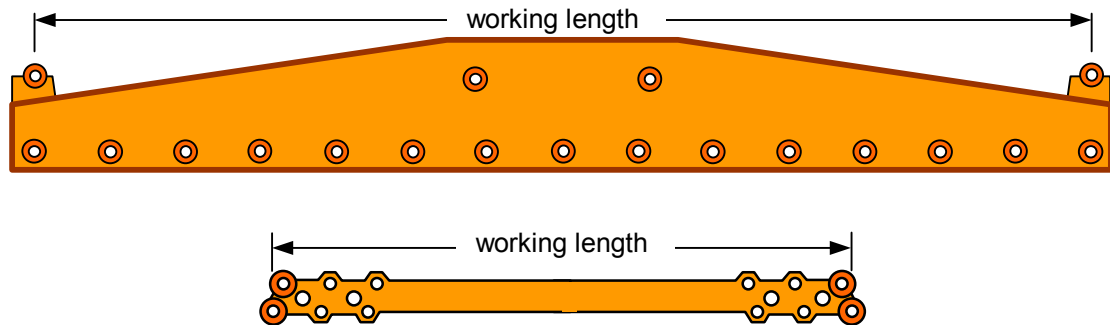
Heavy load lifting beam (top) and ordinary lifting beam (bottom)
